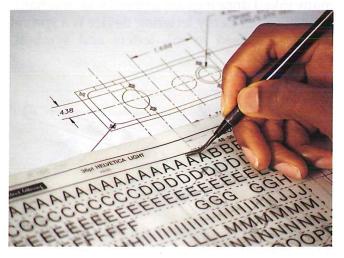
Transfer type can be used to quickly place standard symbols and text onto a drawing.
